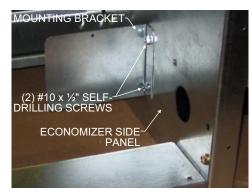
Mounting the Sensor and Bracket in a 3 to 6 and 7.5 Ton Economizer Assembly
